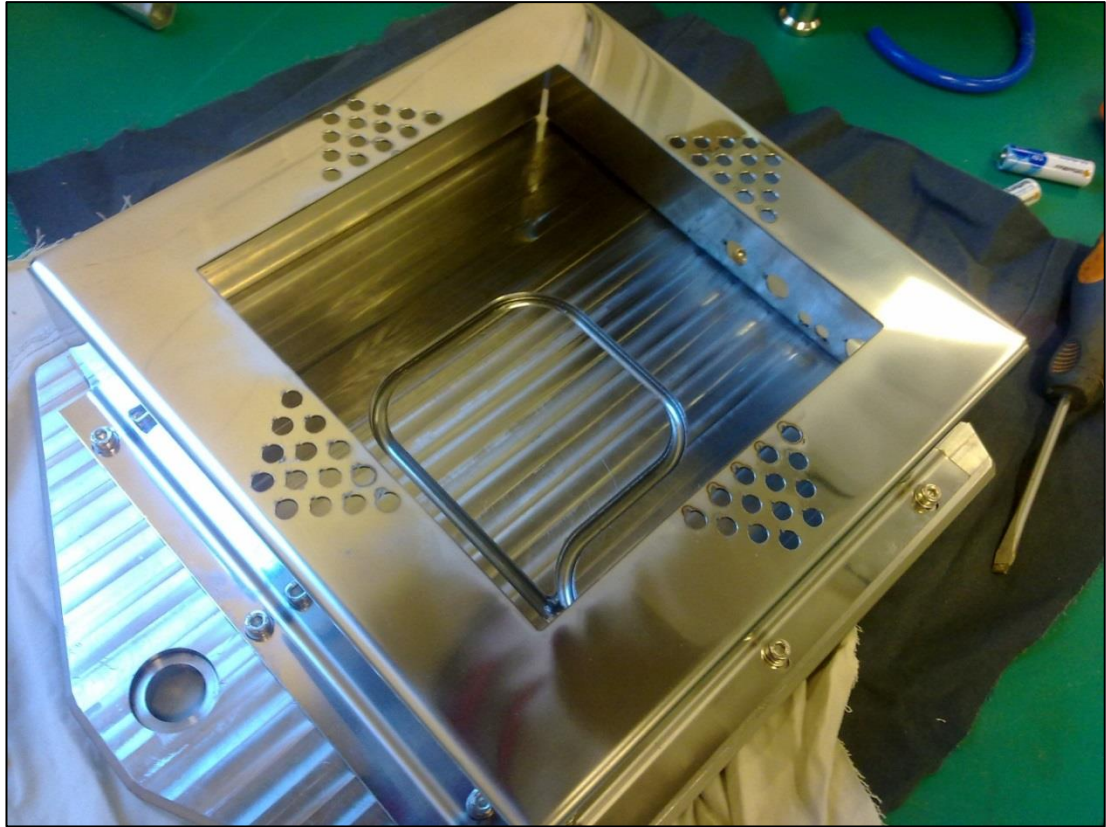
Heater box, laser cut from stainless steel sheet and folded.
